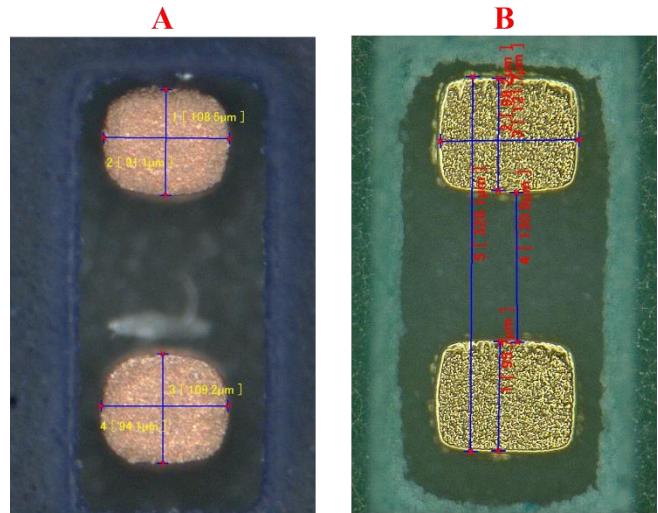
M0201 pads. A - Original board, Cu/OSP pads. B - New board, ENIG pads.
